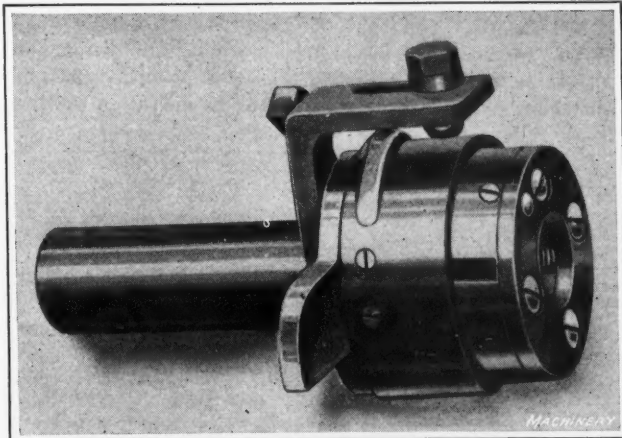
A Single Head of Machine shown in Fig. 1, illustrating Mounting Plate and Jig
